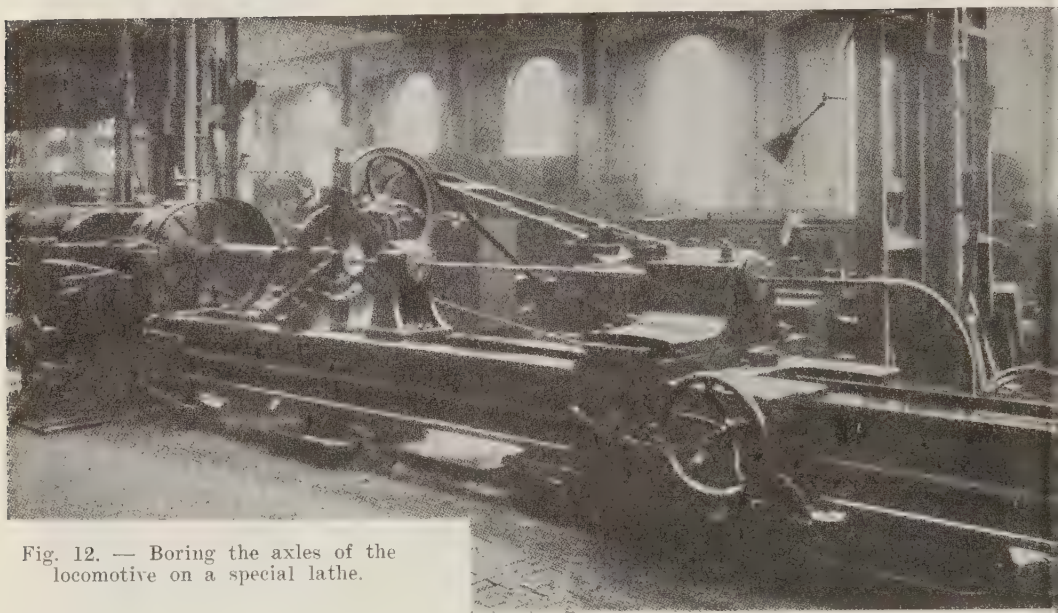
Boring the axles of the locomotive on a special lathe.
